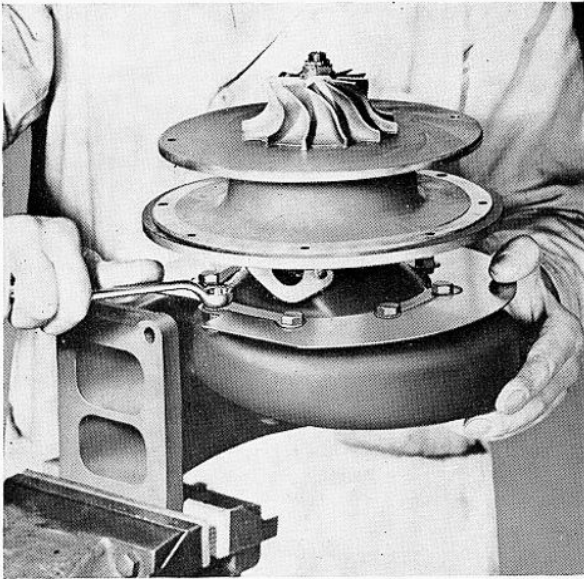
ASSEMBLING CORE ASSEMBLY TO TURBINE HOUSING
